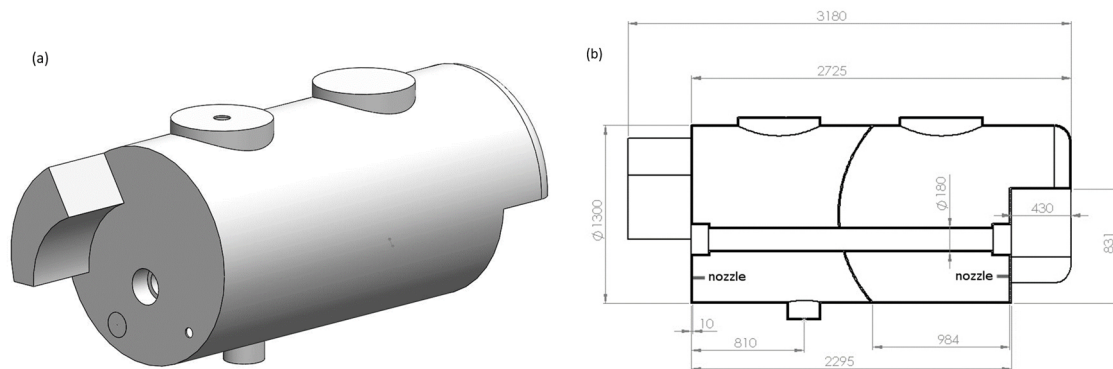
Geometry of the sprayer tank with a 3000 L of capacity. (a) Exterior 3-dimensional (D) view; (b) Internal longitudinal section, 2D view, with two interconnected parts. Dimensions in millimetres.
